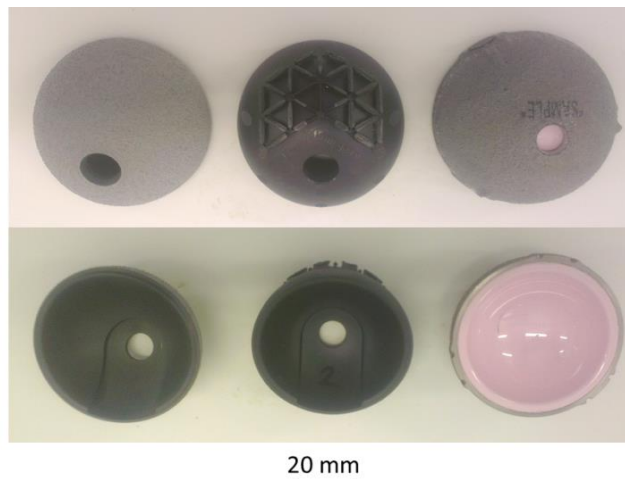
Machined CFRPEEK component with TiHA coating (left), injection moulded CFRPEEK component with backing features (middle) and the DeltaMotion component (right).
